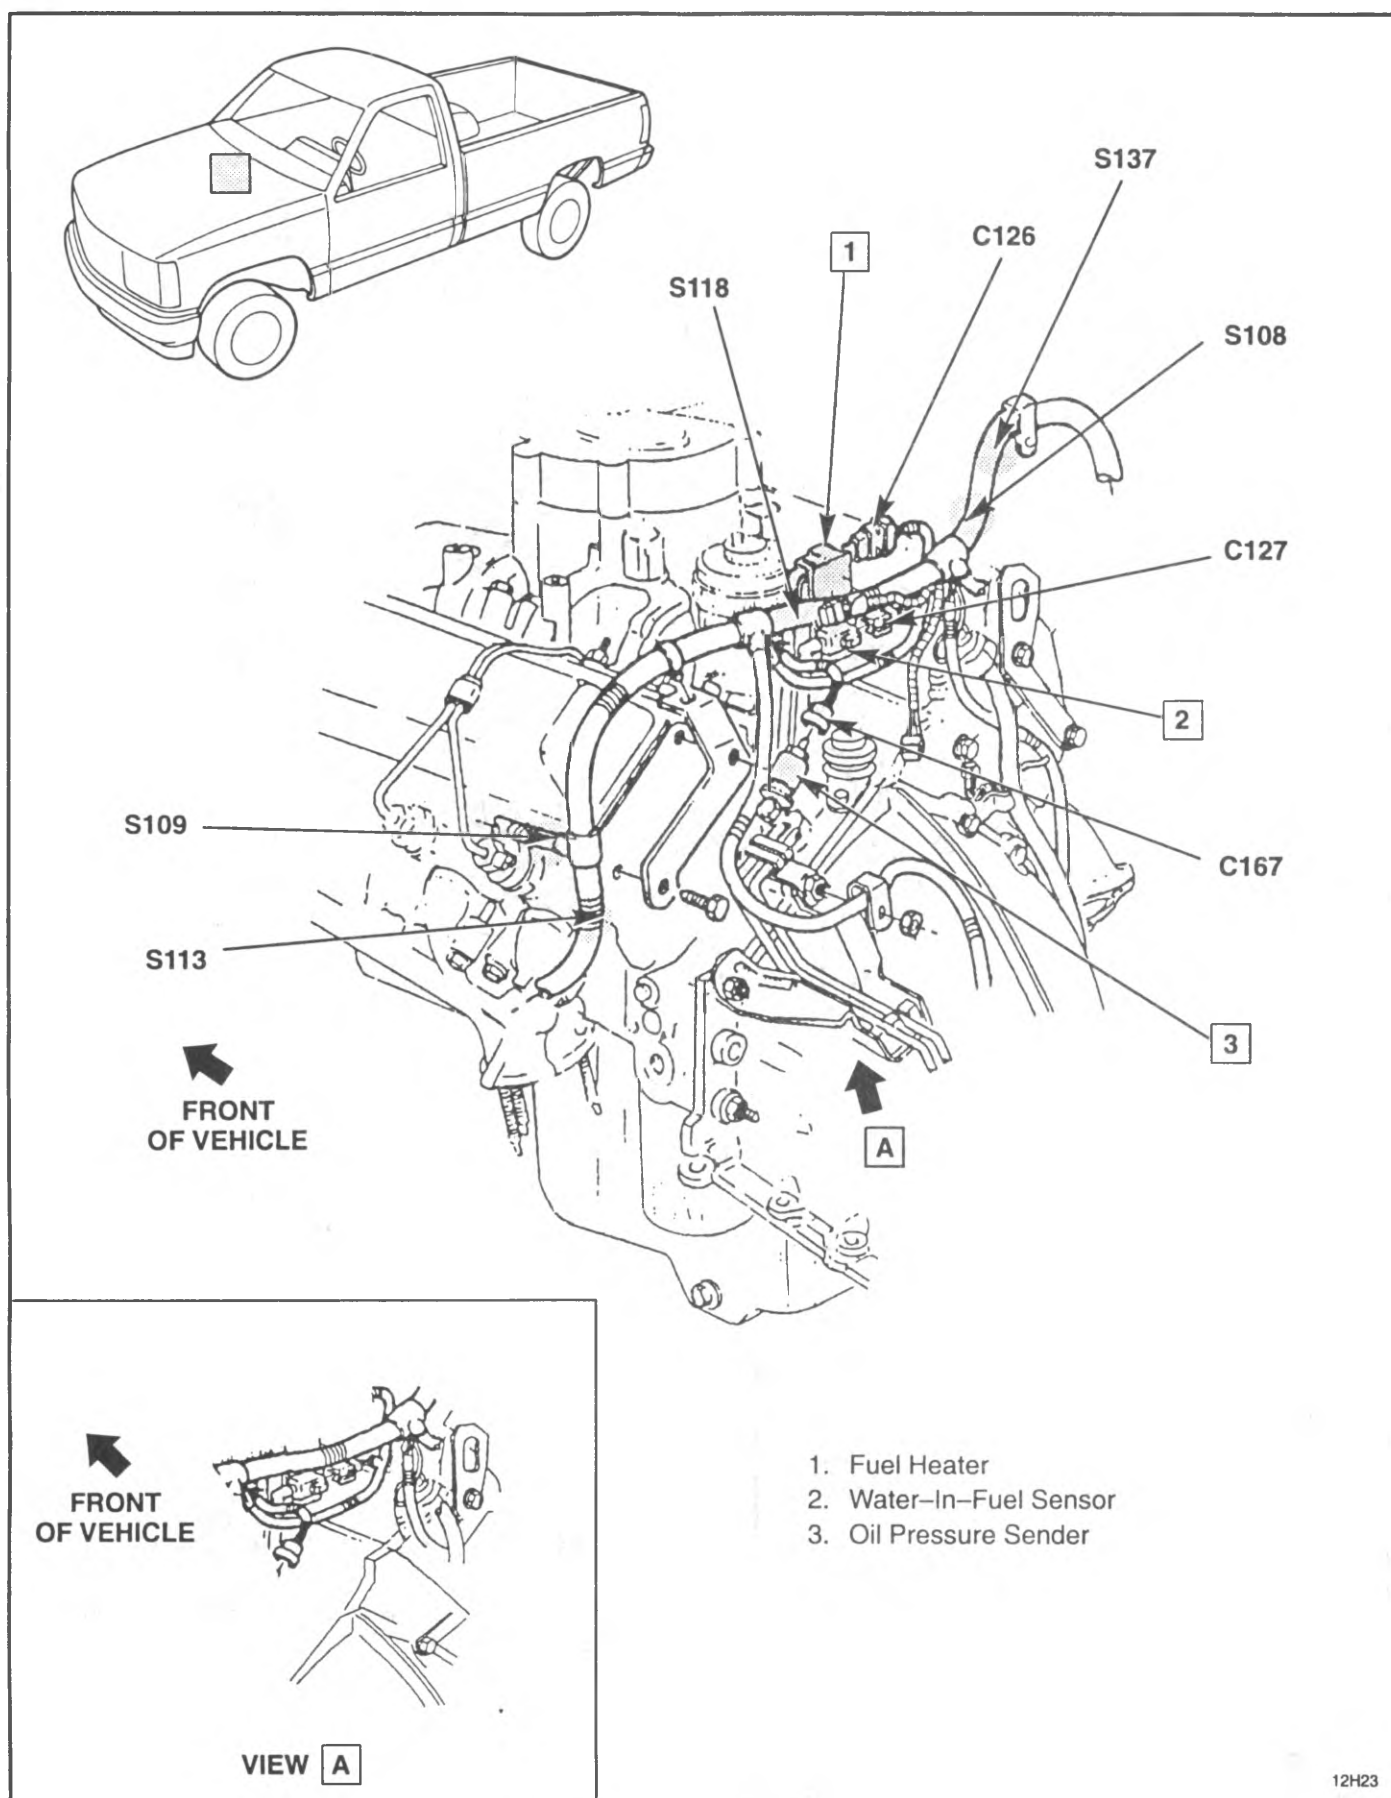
6.5L Diesel Engine Wiring, Rear
